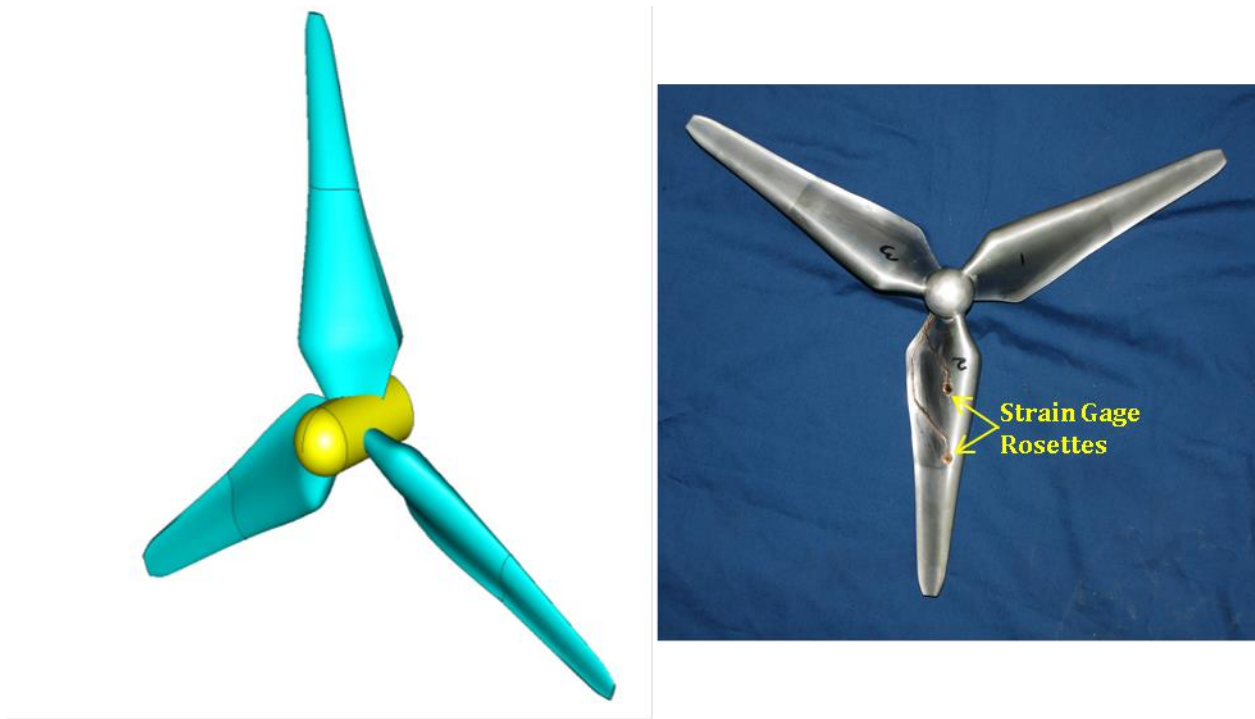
The (left) CAD and (right) fabricated scaled rotor.
